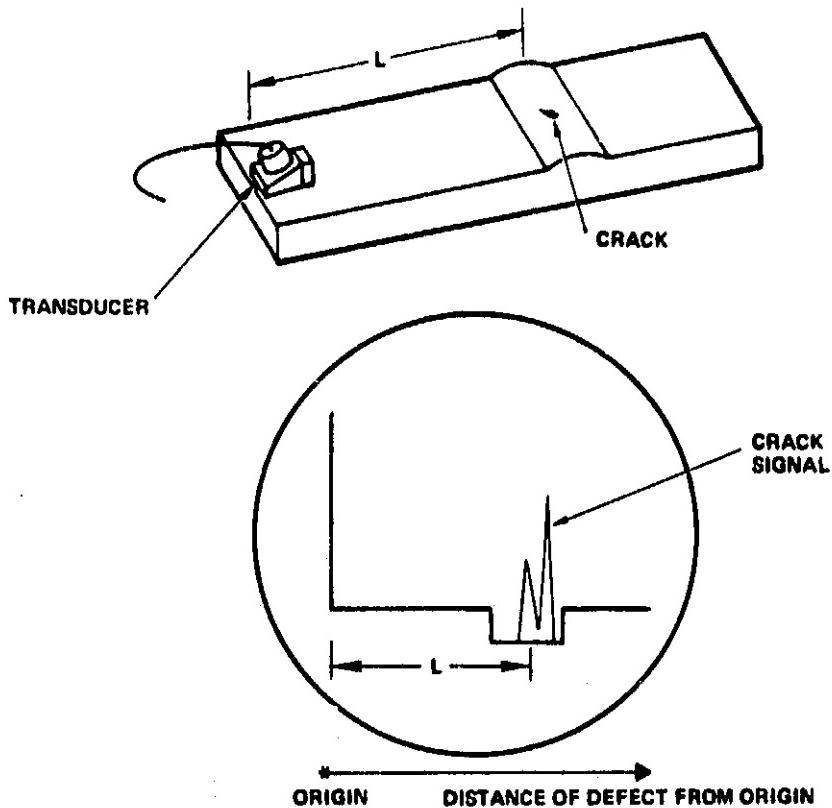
Ultrasonic Angle Beam Scanning for Weld Defect
